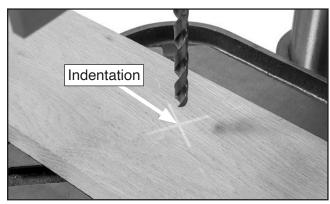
Example of laser crosshairs aligned with indentation on workpiece.
